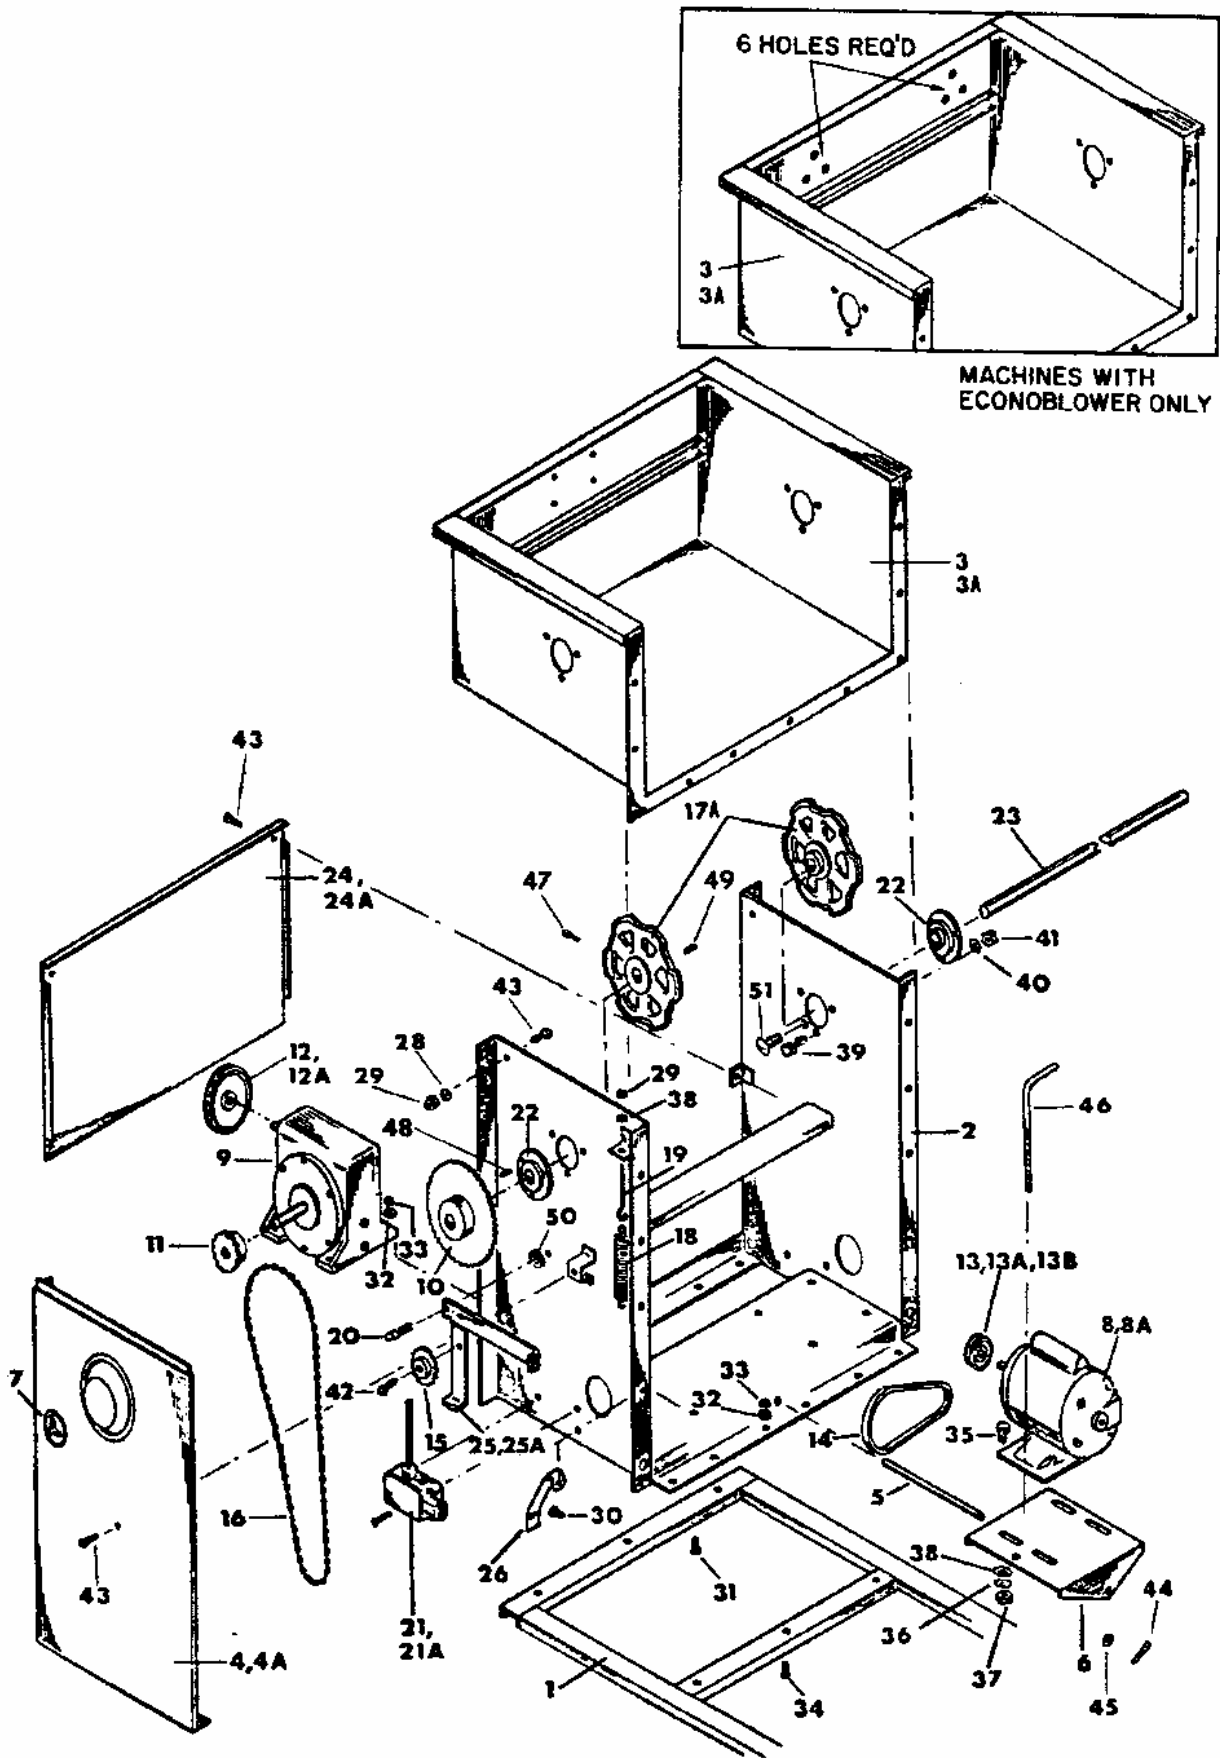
TYPE "B" DRIVE ASSEMBLY
